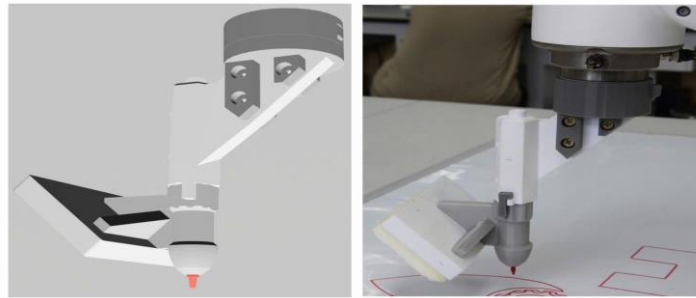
Design of the Pentool and its mounting on the ABB GoFa robot
